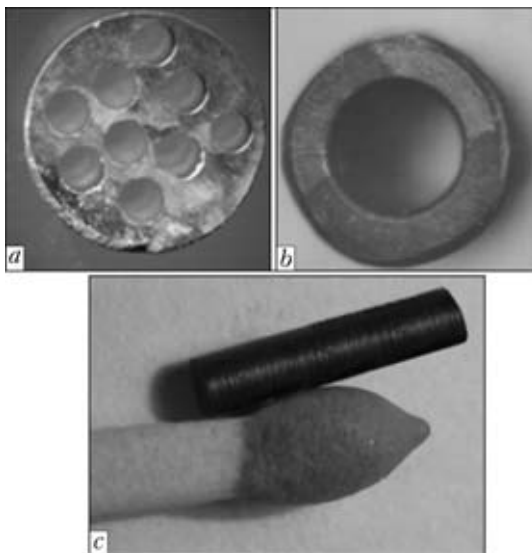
Workpiece remnants (*a*) with manufactured nozzles (*b, c*)
